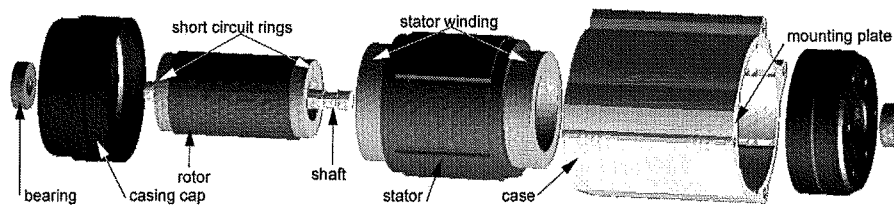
Exploded view of the structure-dynamic model of the induction machine with squirrel-cage rotor
